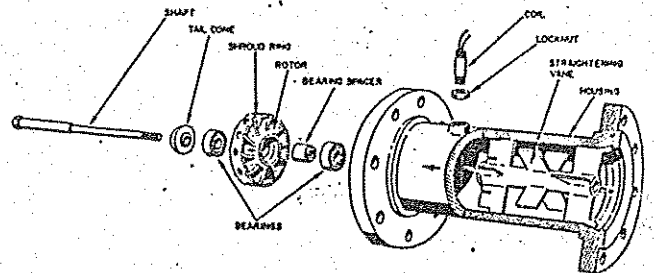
81 Series Turbine Meter exploded view showing Rotor and Bearings.
